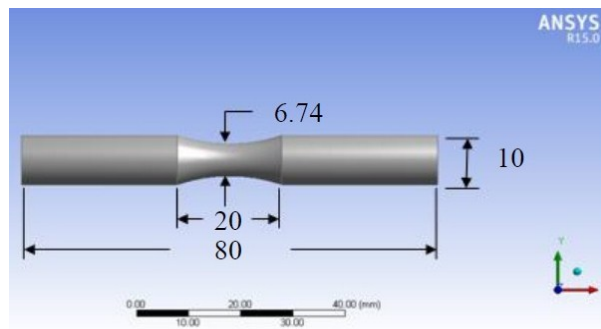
Dimensions of fatigue specimen in millimetre [12].
